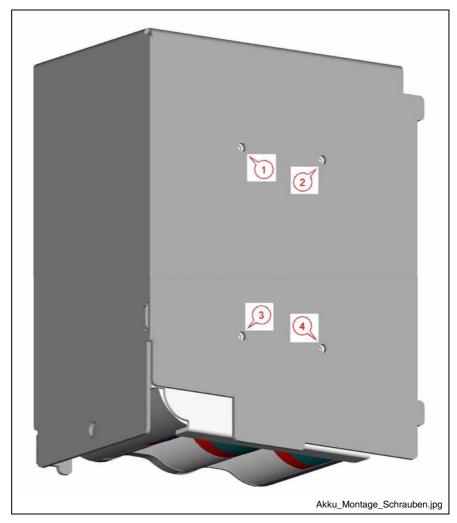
Remove the screws (1) to (4) to remove the rechargeable battery.
